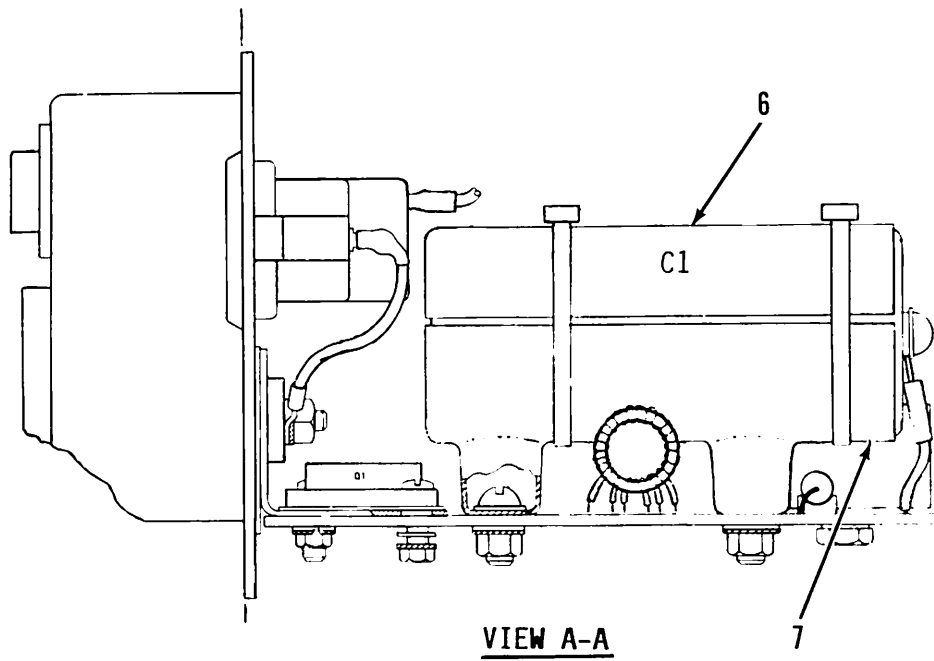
A. CHARGER PCB ASSEMBLY, DEFIB
